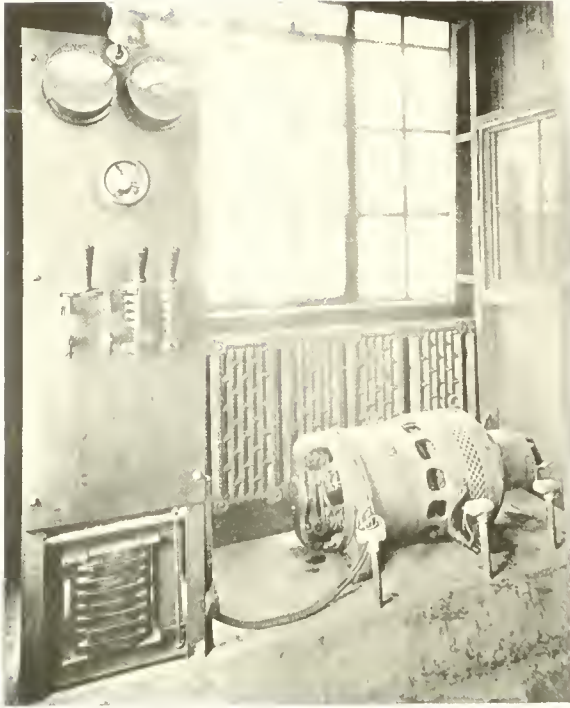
Lincoln Arc Welder in the shop of the Big Lake R. R. at Minneapolis, D.
